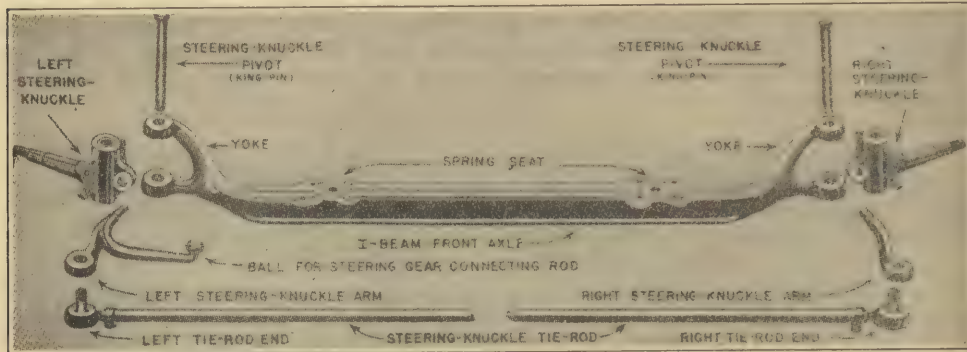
An I Beam Type Front Axle (Dead, Nondriving) and Attached Steering Parts.
